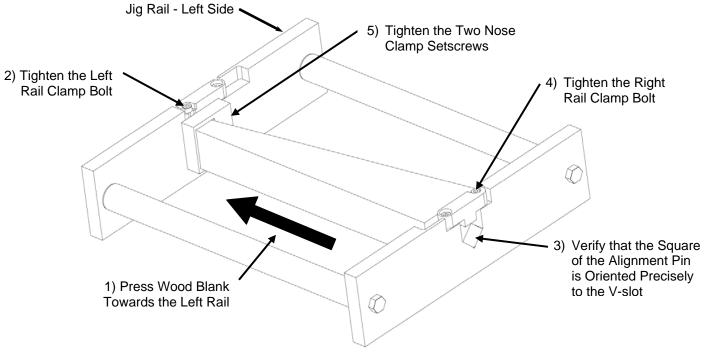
PROPERLY SETTING THE DRAGSTER BLANK IN THE JIG
